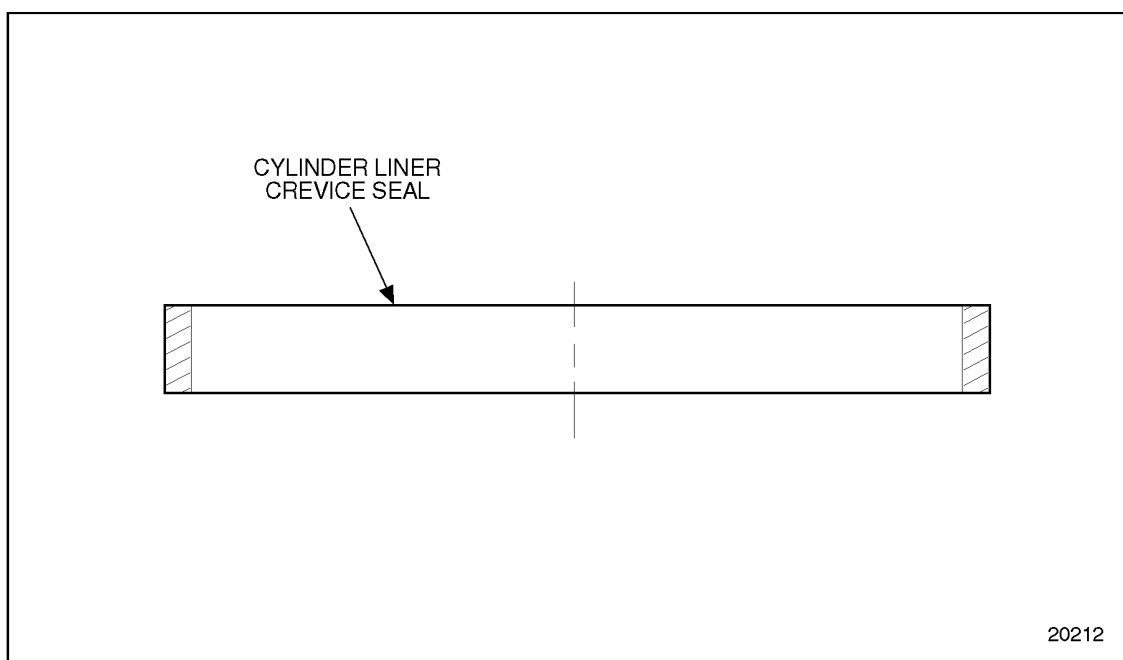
Cylinder Liner Crevice Seal Cross Section
